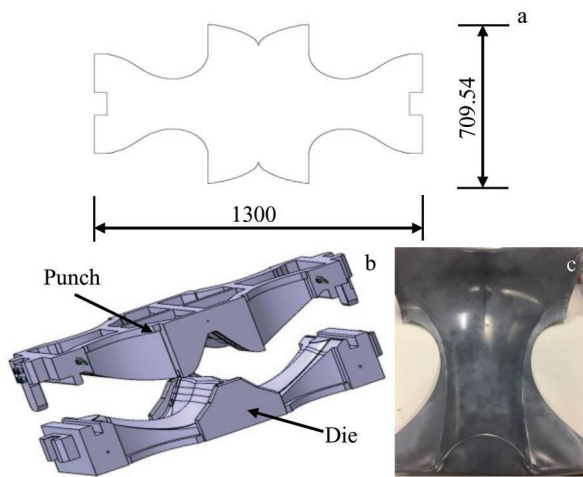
Schematic diagrams of blank (a) and hot stamping tools (b); appearance of saddle shape part (c)
